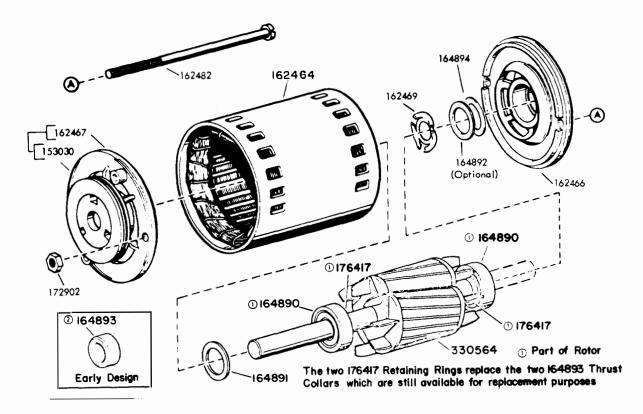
Synchronous Motor Assembly 151795 (Standard) -Used on LMU3 and LMU38
